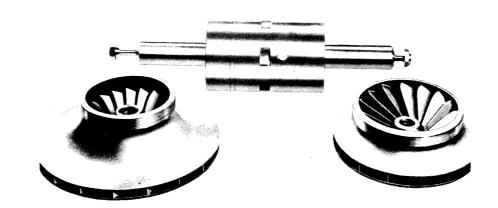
Rotating Parts of Hydrogen Expansion Turbine.
